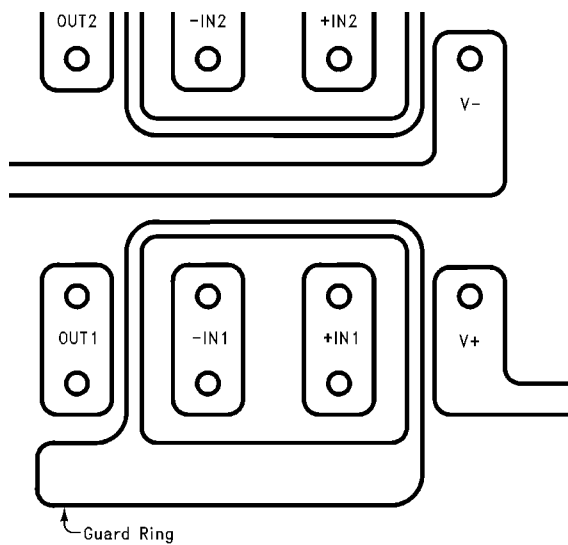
Example of Guard Ring in P.C. Board Layout
